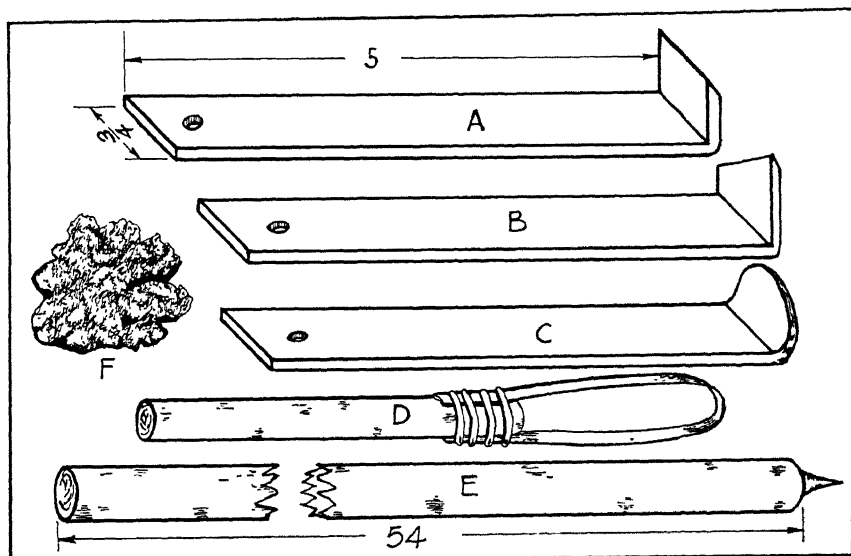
Turning tools. *A* and *B*, square and skew-pointed tools used in smoothing surfaces; *C* and *D*, round-nosed and loop tools used in making rough cuts; *E*, tool holder or turning stick made from a broom handle with a sharp nail for a spur; *F*, sponge used to wipe the piece when the turning has been completed. The loop tool at *D* is made by wiring a piece of band-saw blade to a round stick
